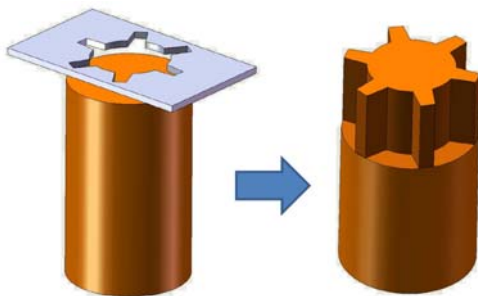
Fabrication of micro gear electrode using reverse EDM process
